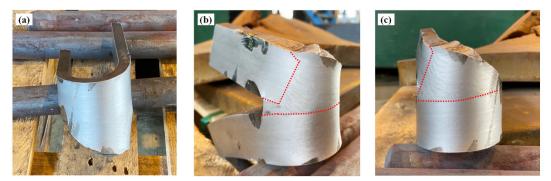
Results of the bending tests for node welding zone. The area indicated by the red dotted line is the weld bead.
